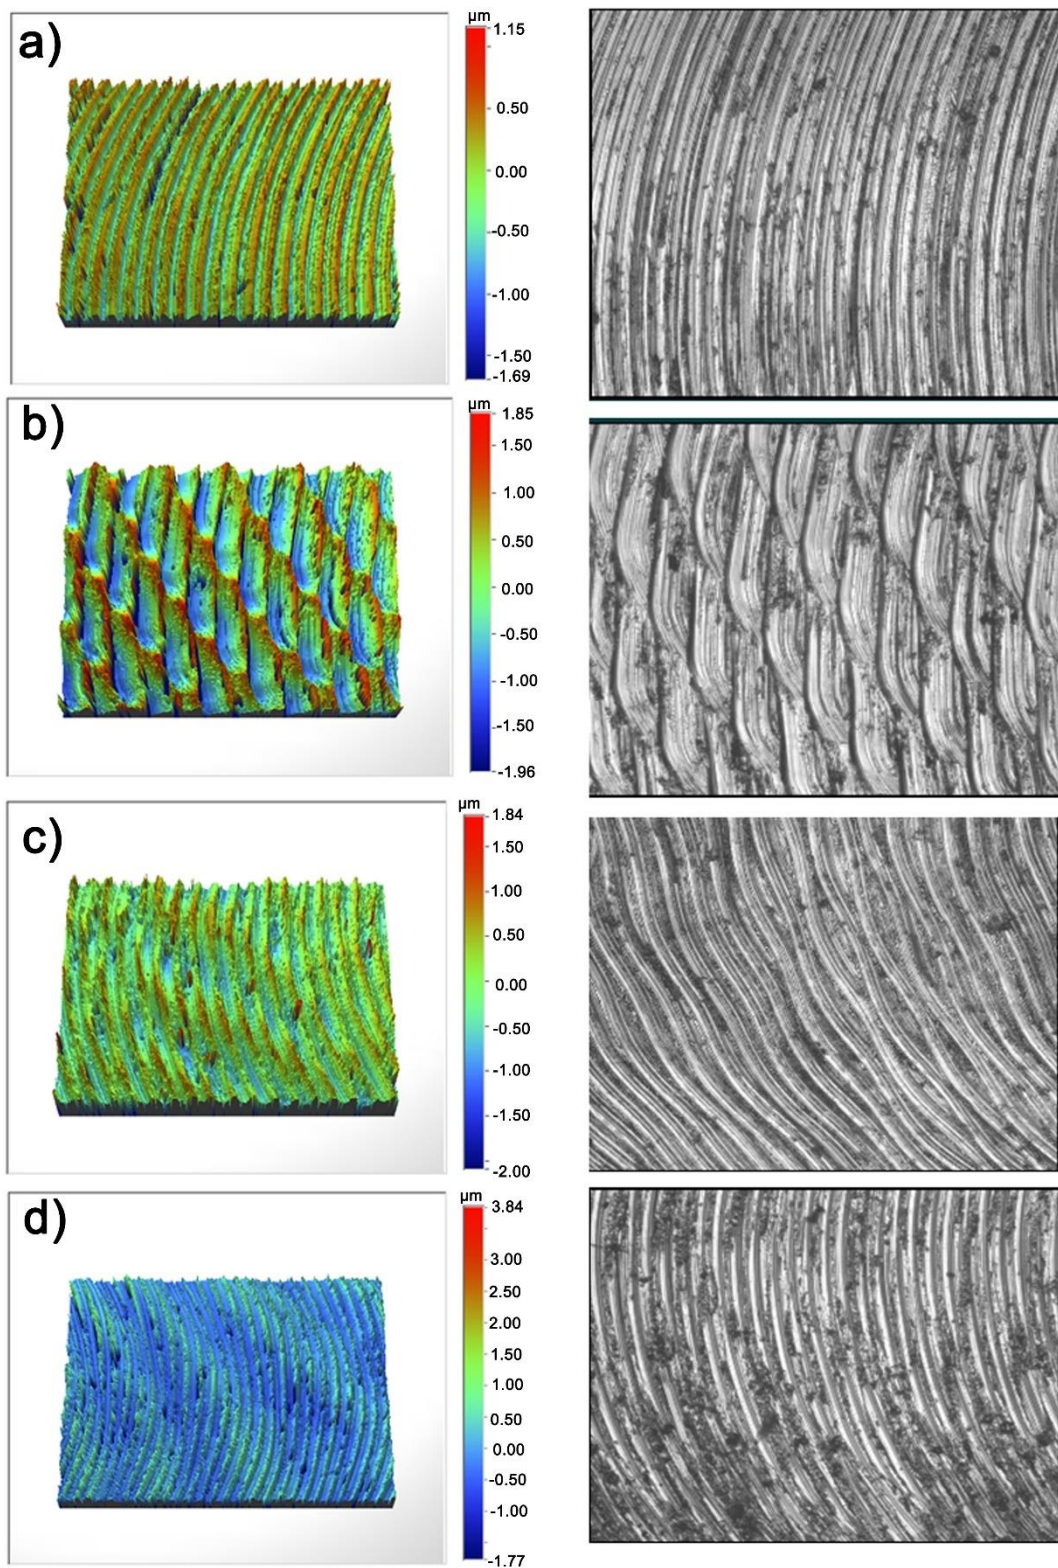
Machined surface textures results from vibration assisted milling. Machining conditions: a) Set 1 (without vibration assistance); b) Set 2; c) Set 3; d) Set 4
